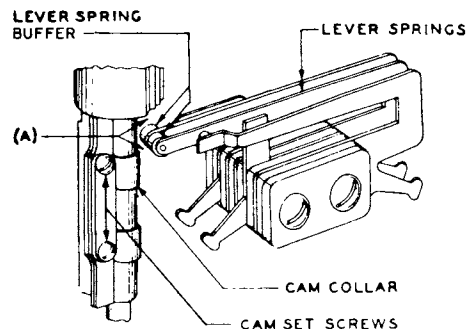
Clearance Between Lever Spring Buffer, and Rotary Hub and Cam Collar.
